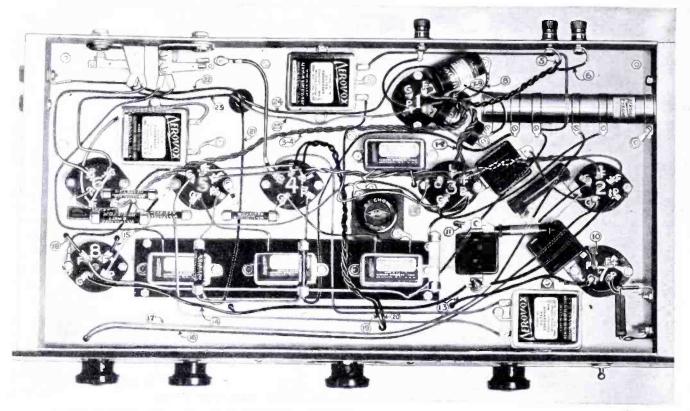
Showing bottom view of the Baird Universal Television and Short Wave Receiver chassis, assembled and wired.
